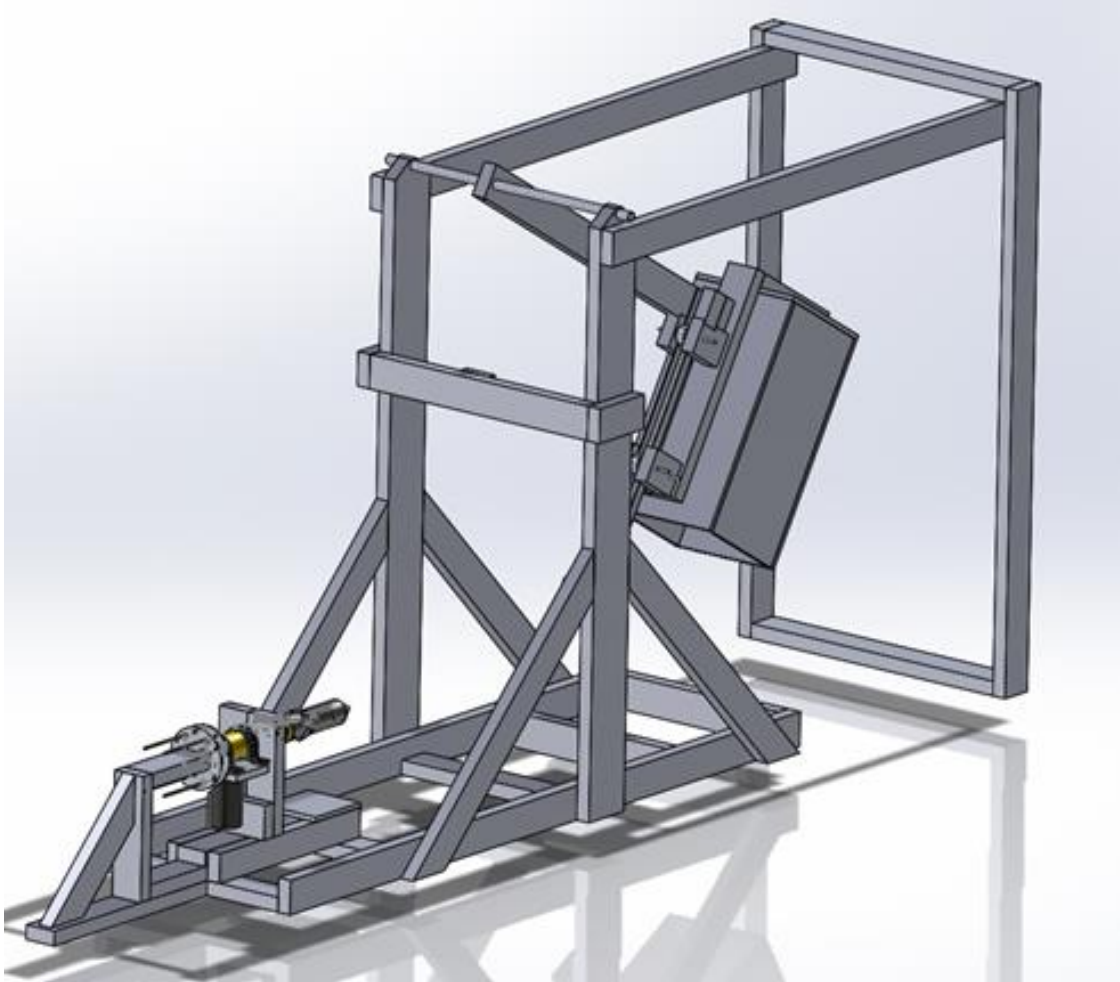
Full Assembly Test Rig (Swing Test Configuration)
